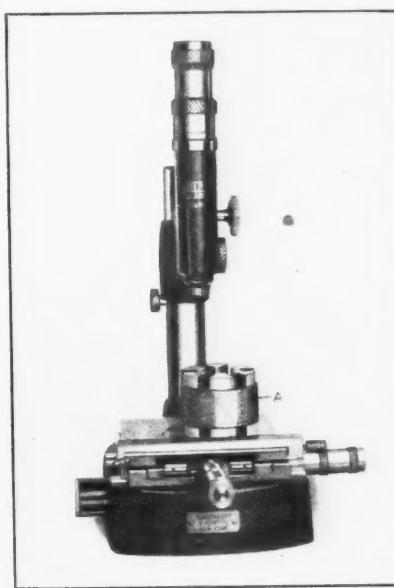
Toolmaker's Optical Micrometer for checking the Measurements of Small Gages, Screw Threads, etc.
